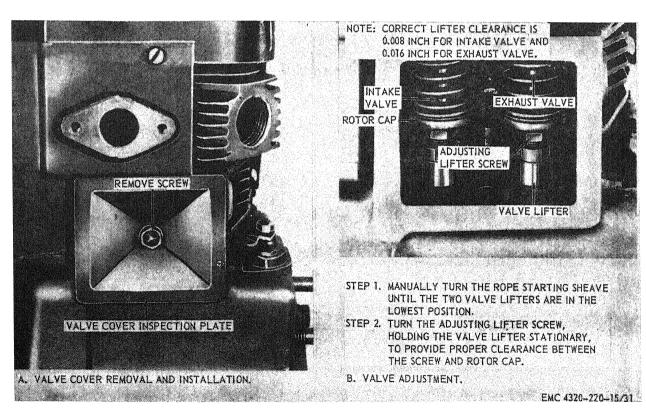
Intake and exhaust valves inspection cover plate, removal and installation.
